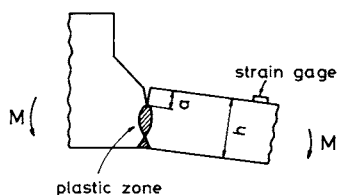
Schematic illustration of cross section of welding joint with crack and plastic zone.
